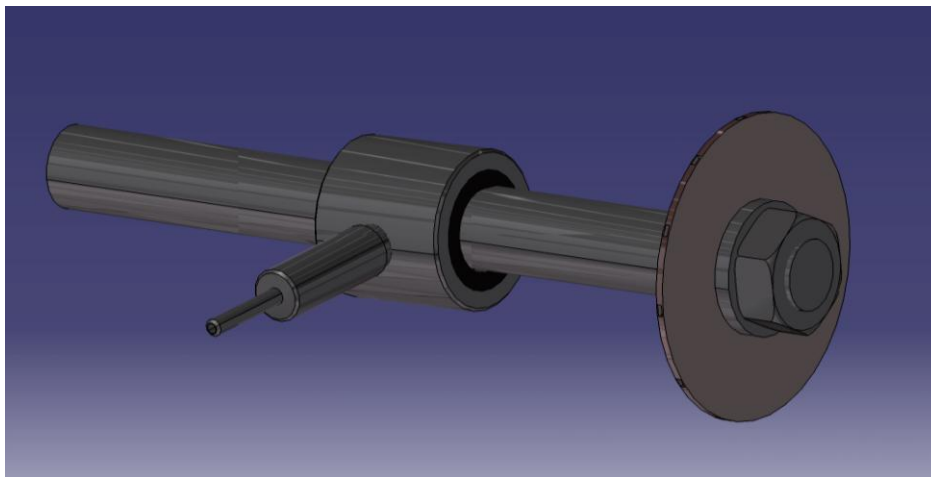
Stratified disk assembly, shaft, connecting sleeve for introducing the working fluid through the OT
